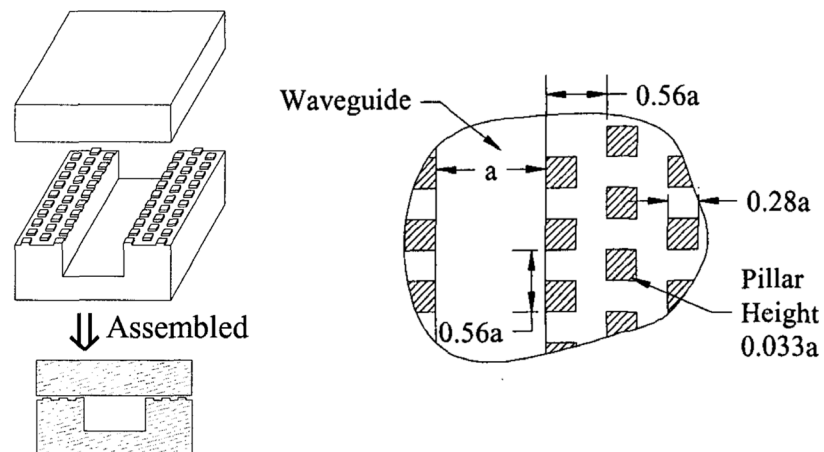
Photonic Crystal Joint metal pillars formed on one piece (left) and physical dimensions (right) [5]
